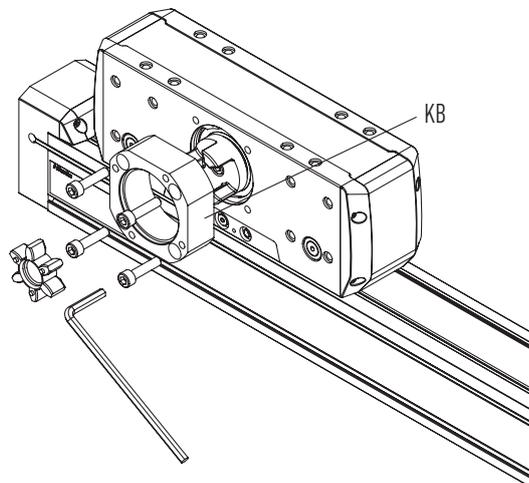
Attaching the elastomer insert and mounting the coupling housing KB
